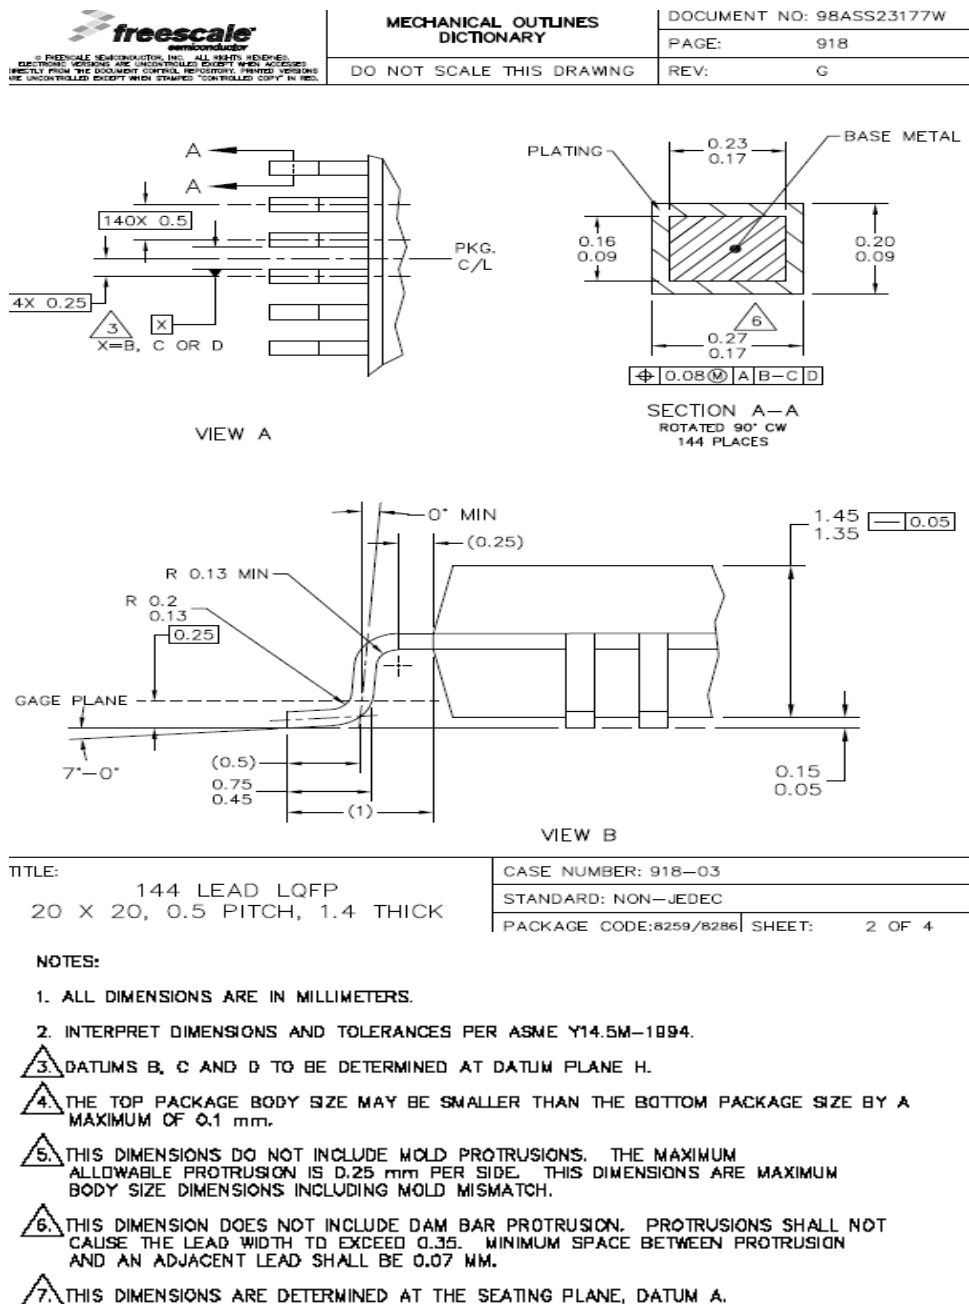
144 LQFP package mechanical drawing (2 of 2)
